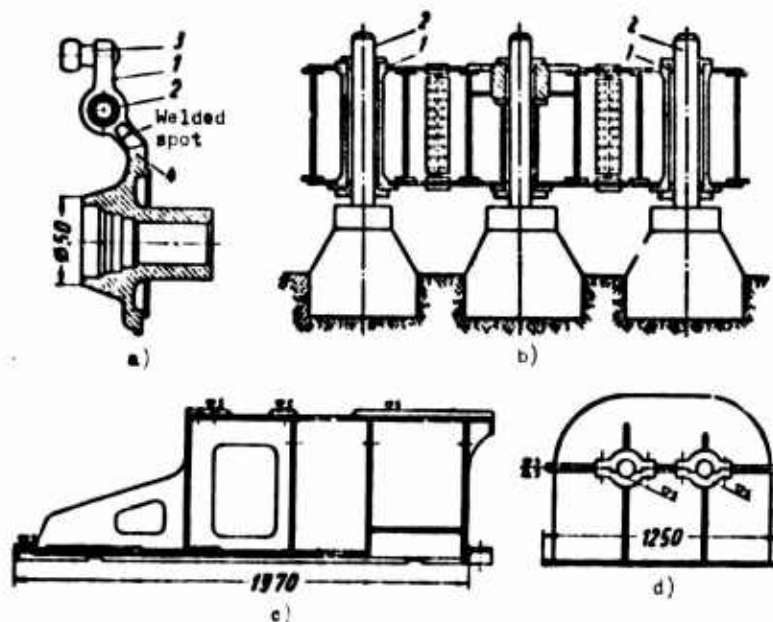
Examples of application of basic technological variants of manufacture of welded parts.
